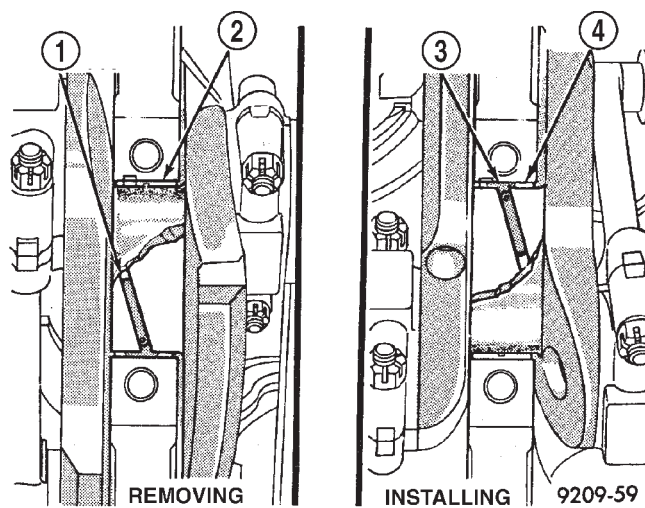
Upper Main Bearing Removal and Installation with Tool C-3059
